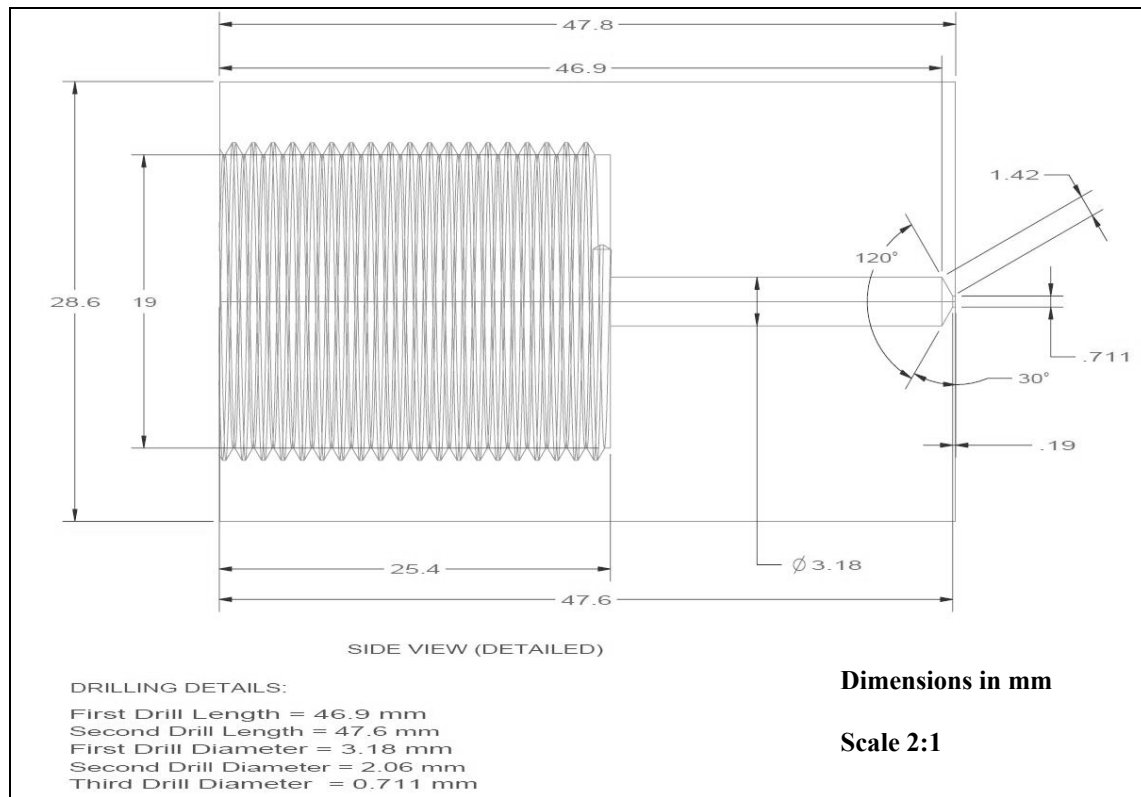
Schematic CAD Diagram of the Ejector Nozzle showing Dimensions in mm (Scale 2:1).
